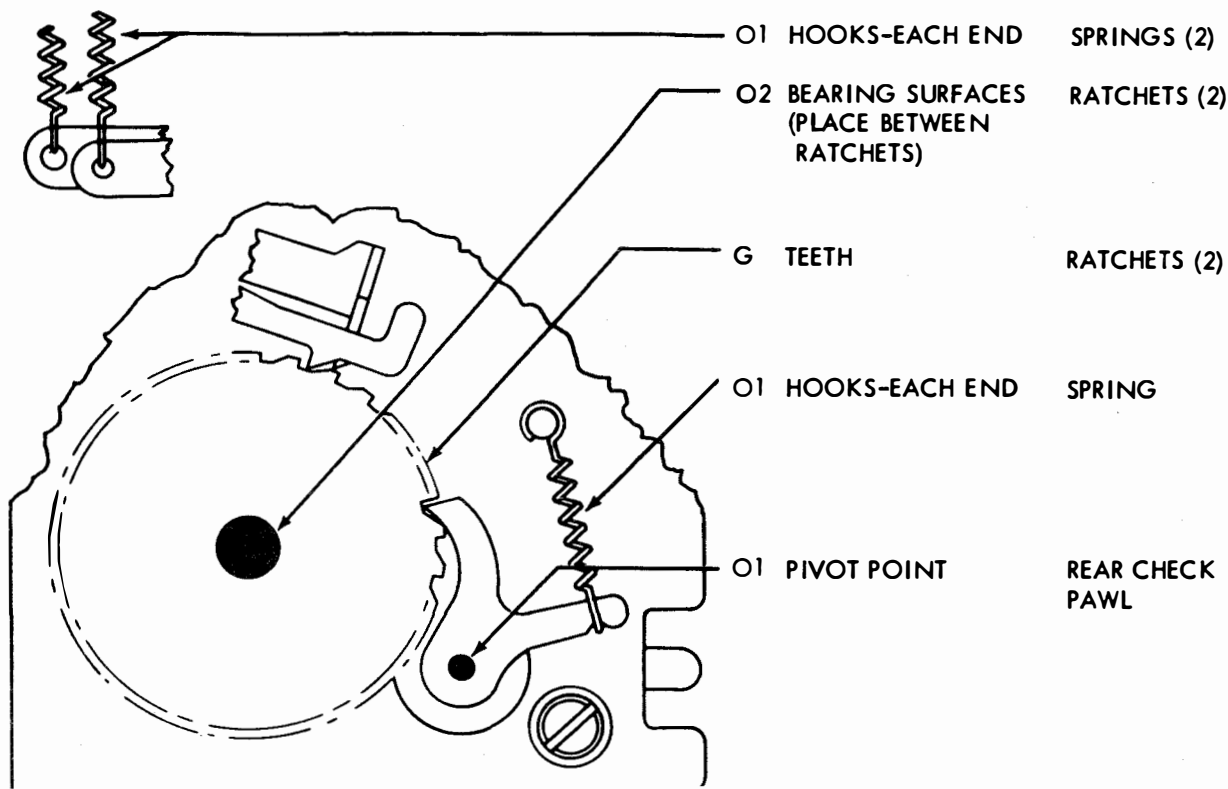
Remote Control Non-Interfering BLANK Tape Feed-Out Mechanisms, Component Lubrication Points
